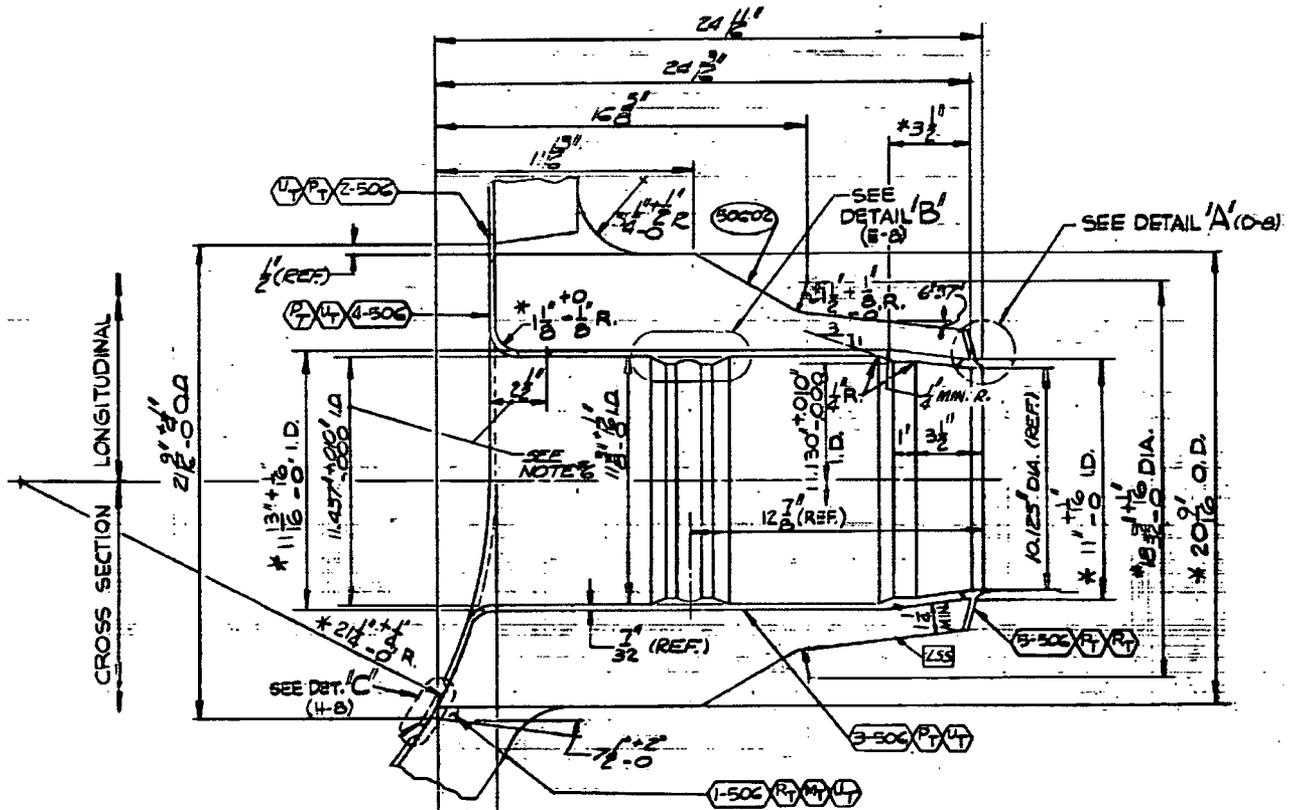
RCS Surge Nozzle Geometry for Millstone
